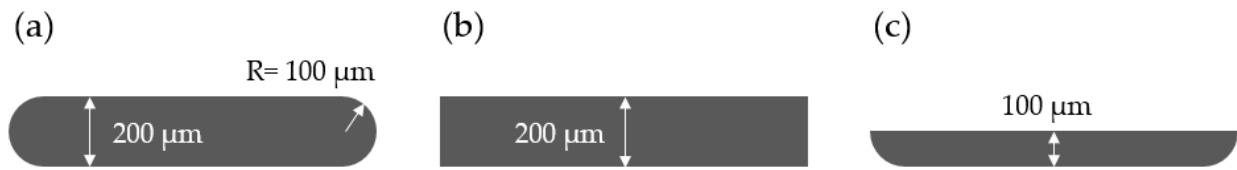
A illustration of the LiTaO₃ edge shape: (a) C-cut edge; (b) Trimmed edge; (c) Thinned edge (half C-cut edge).
